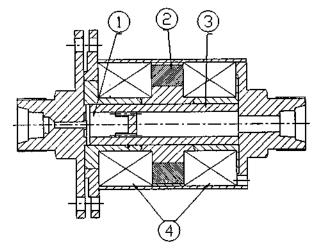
Latch Valve. 1: Valve seat; 2: Magnet; 3: Popet; 4: Coils.
